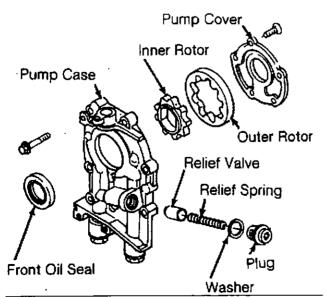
Identifying Oil Pump Components Courtesy of Subaru of America, Inc.
